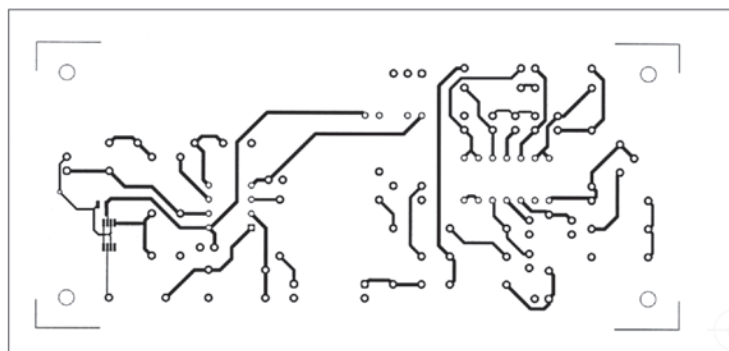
Printed circuit boards: top, bottom, and silk (stuffing guide).
